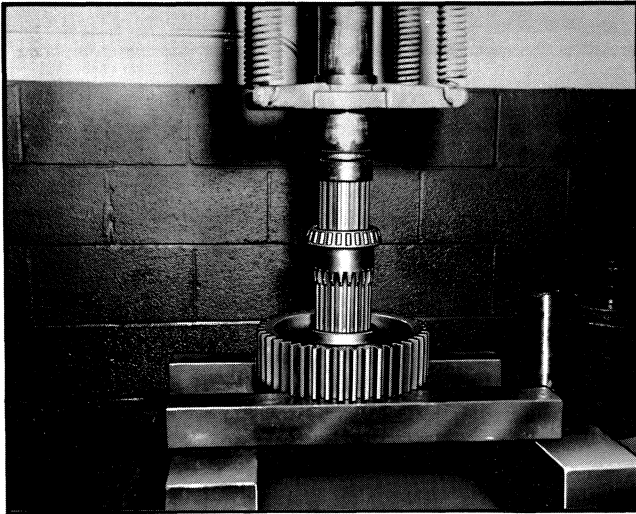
Pressing 44 Tooth Gear on Output Shaft ^{F16D}
